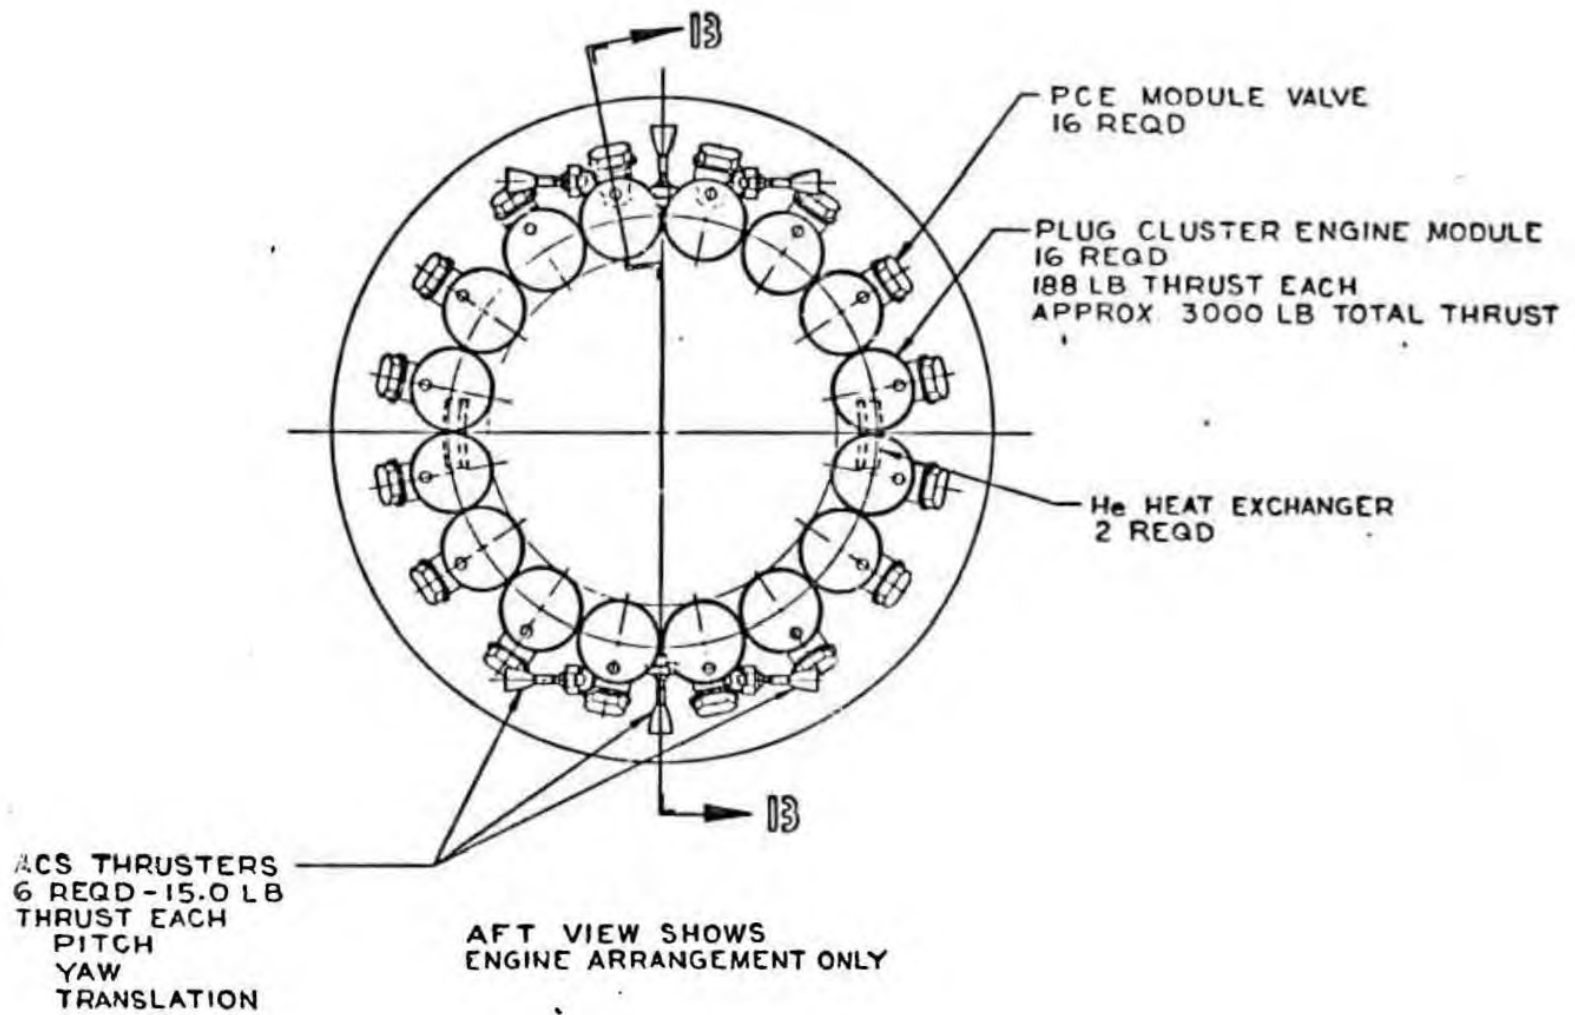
N₂O₄/MMH Plug Cluster Engine (Rear View)
